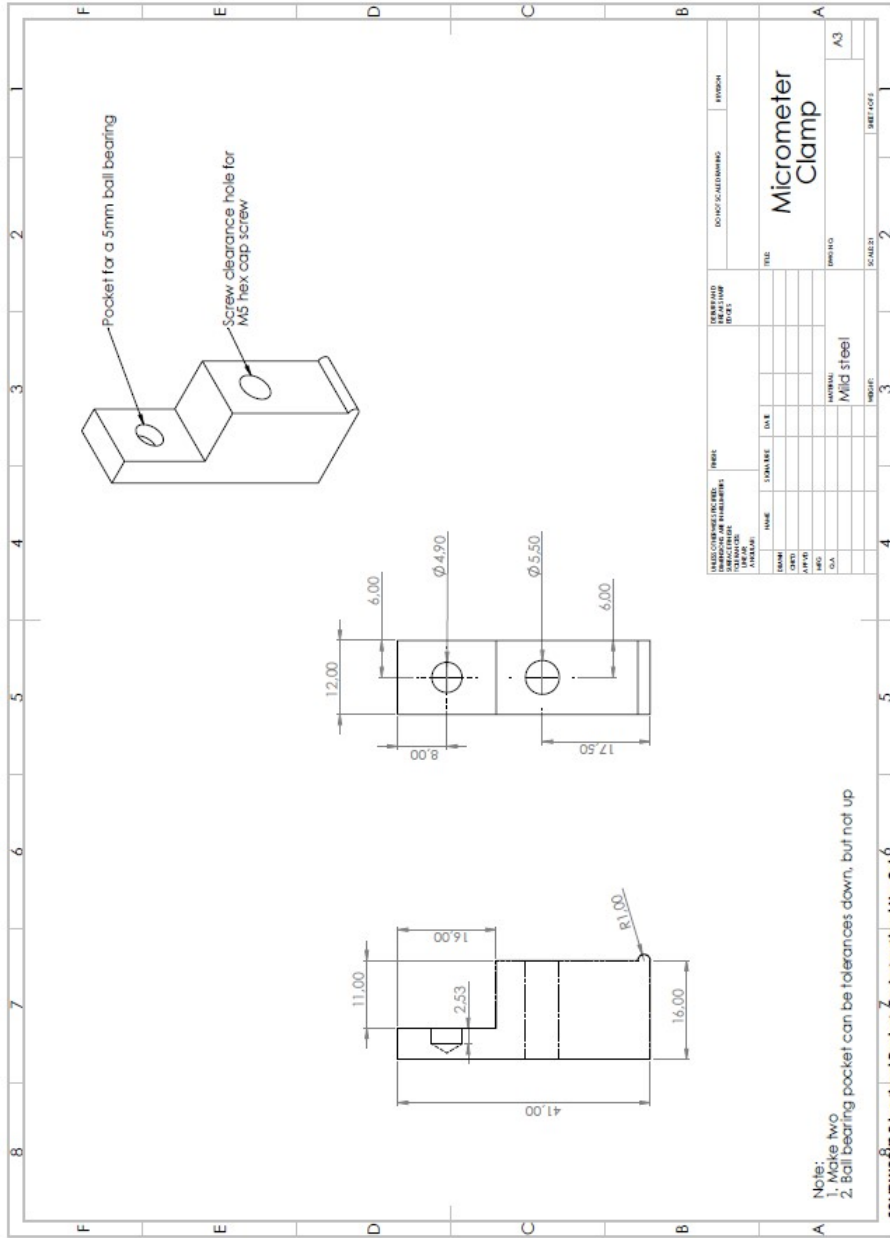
Part drawing for the mounting fixture micrometer clamp.
